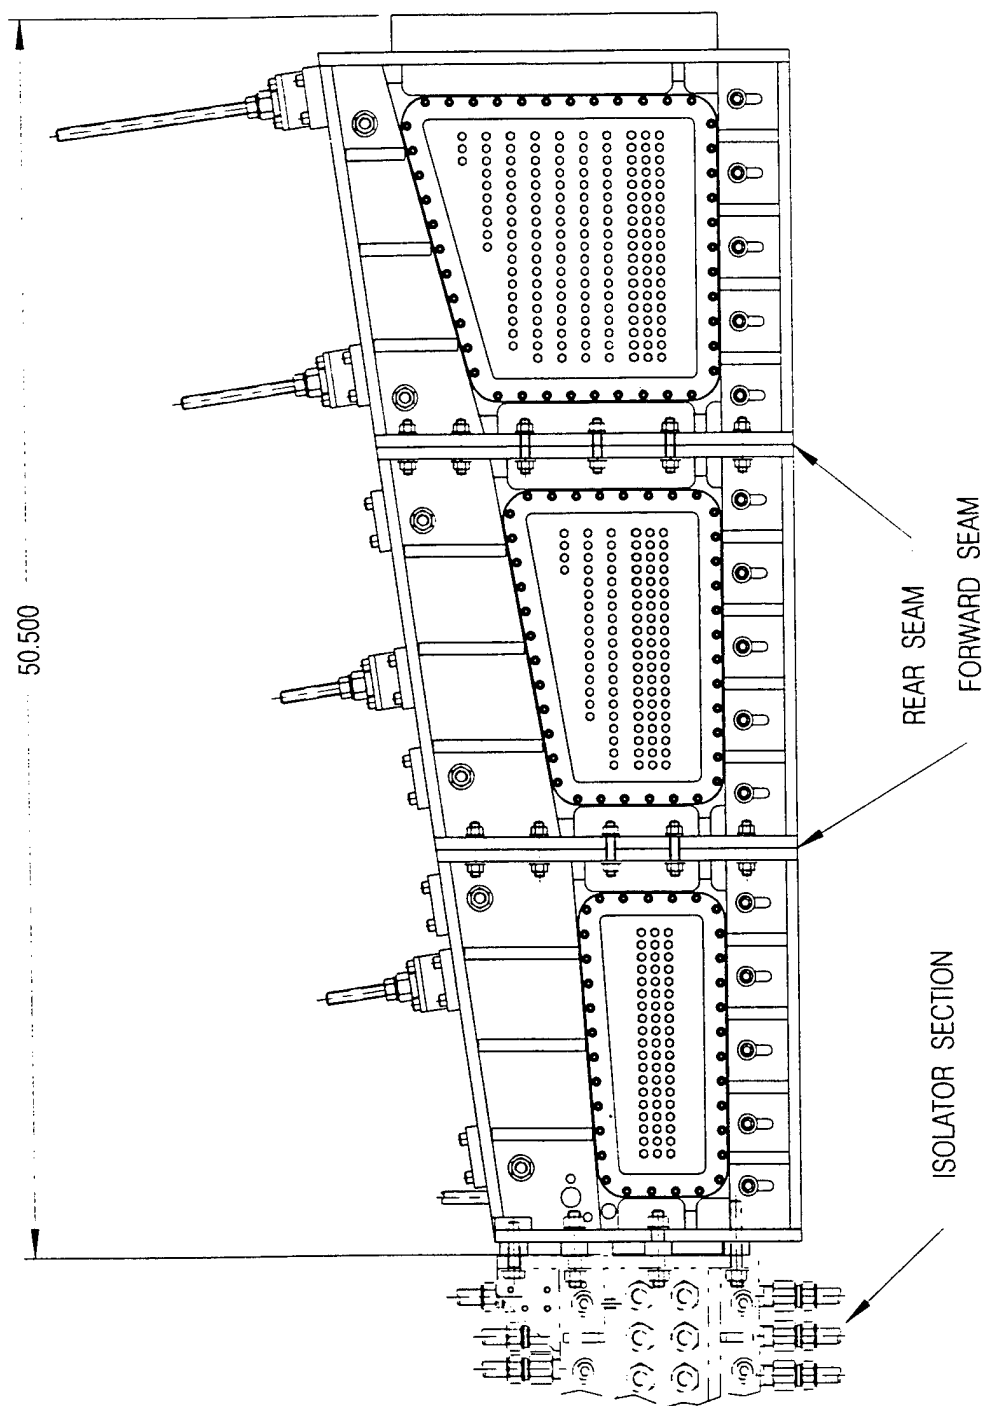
Schematic Diagram of Scramjet Test Rig Heat-Sink Combustor Section
